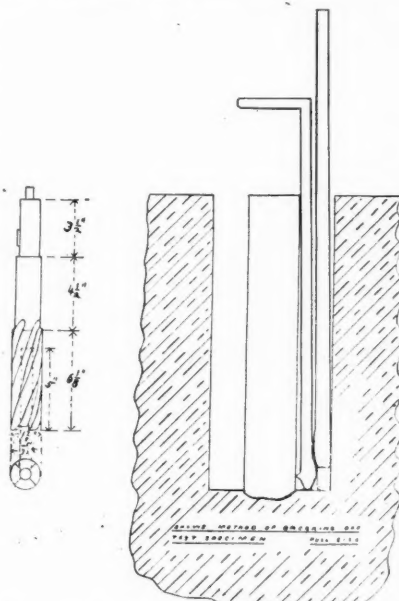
Tool for Obtaining Test Specimens from End of Driving Axles.
